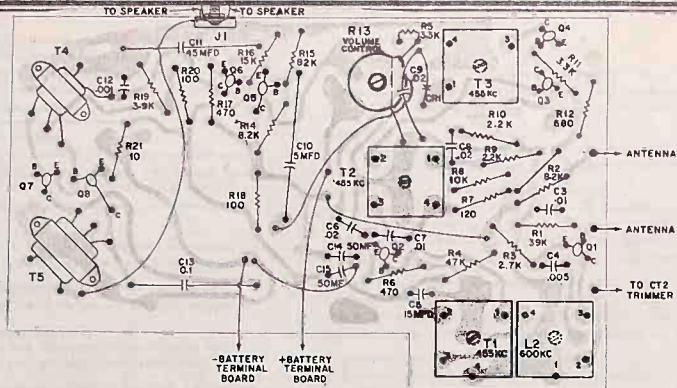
PRINTED CIRCUIT CHASSIS DIAGRAM
